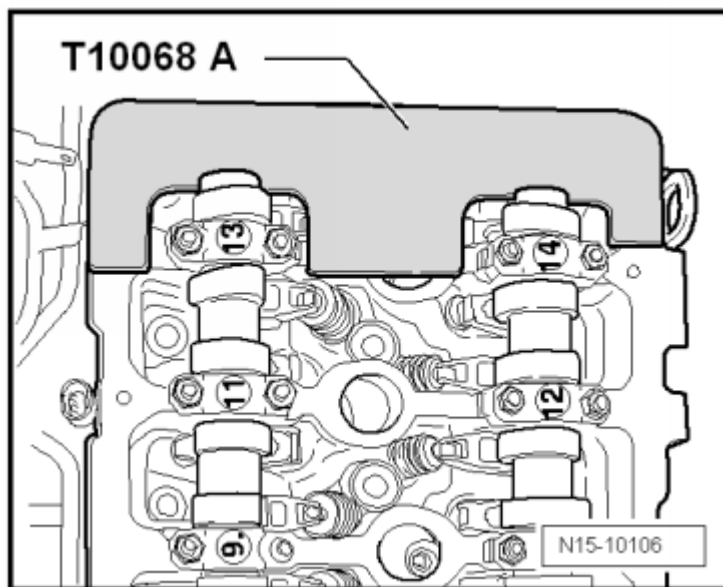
Identifying Camshaft Bar T10068 A Engage In Shaft Grooves
